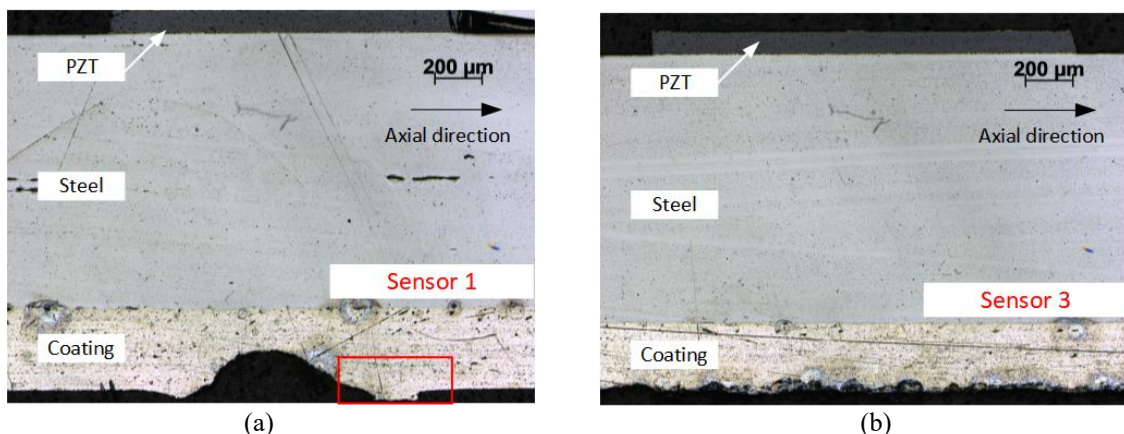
The cross-section image of a damaged aluminum-alloy coated bearing shell. (a)A deep groove shaped wear scar, and (b)A common worn surface.
